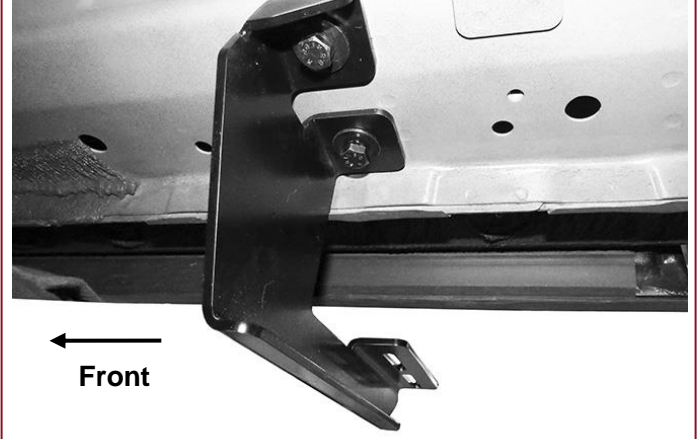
Attach Passenger/Right Front Mounting Bracket to threaded holes
